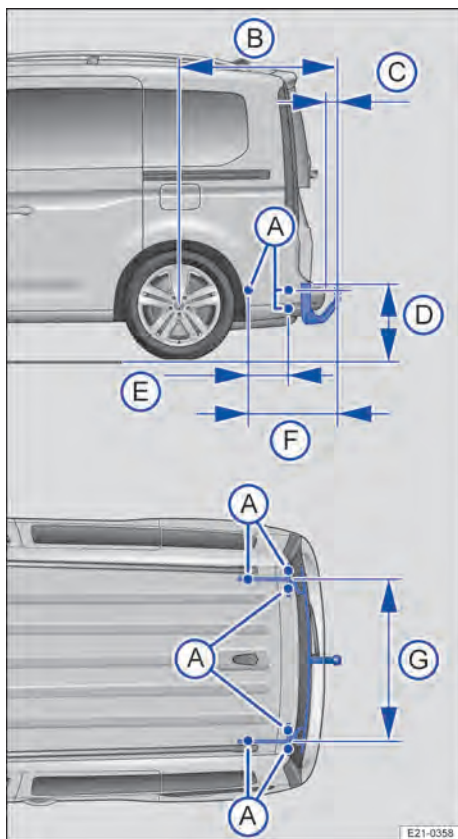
Dimensions and attachment points for retrofitting a towing bracket.
